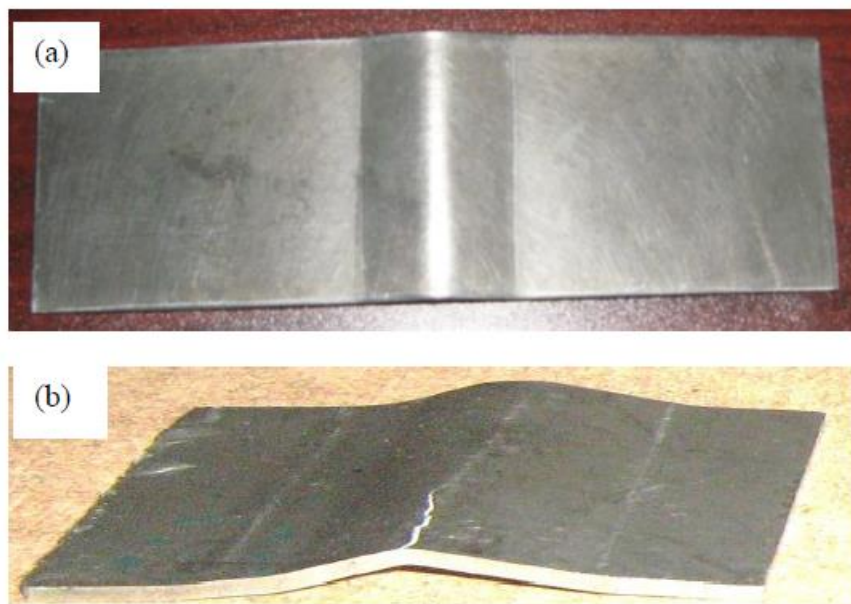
(a) Sheet sample in bending state (b) Fractured sample
